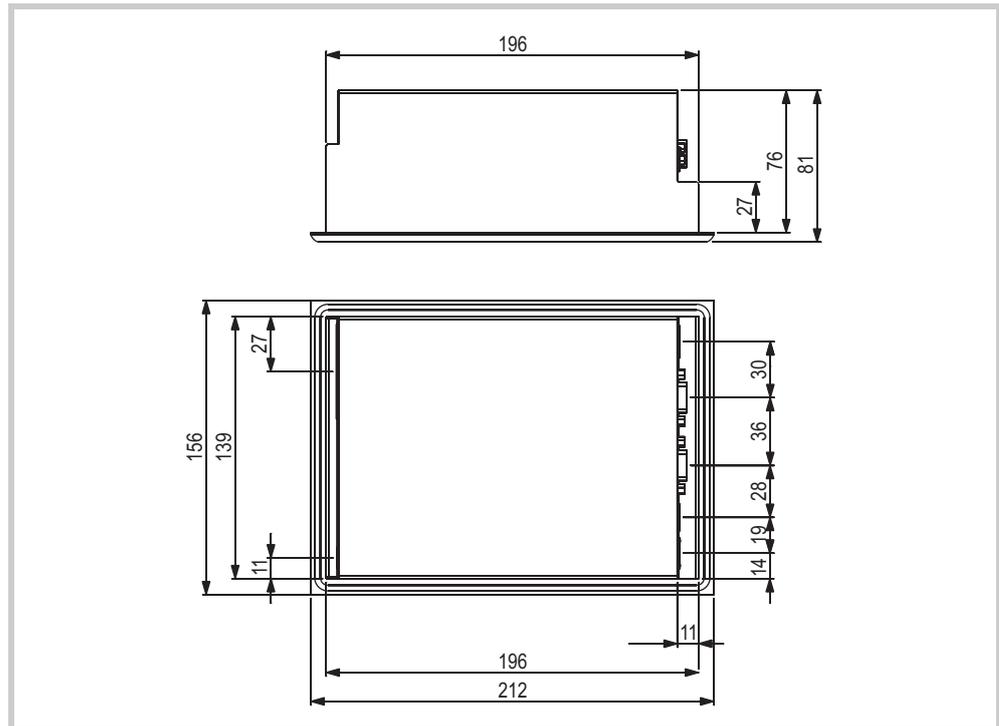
Mechanical dimensions of the 5.7" devices with standard or stainless steel front in mm
